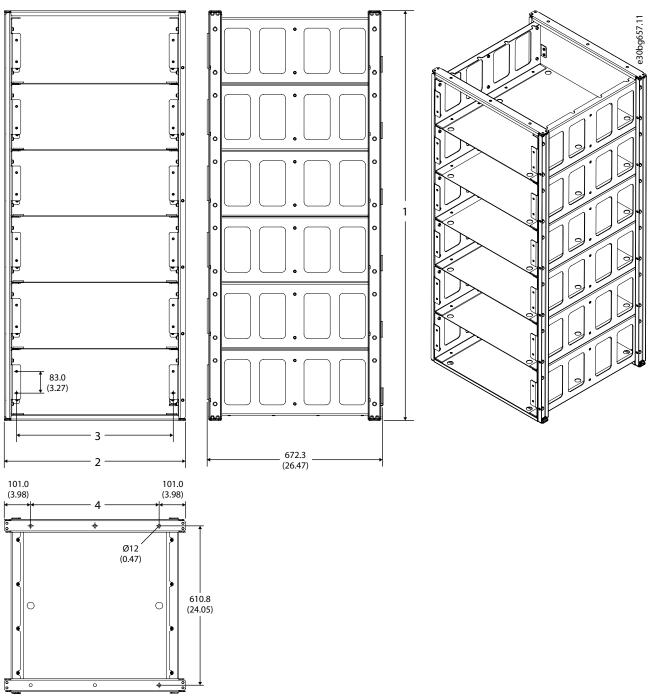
Mounting Rack L20/L30/H30 Dimensions in mm (in)
